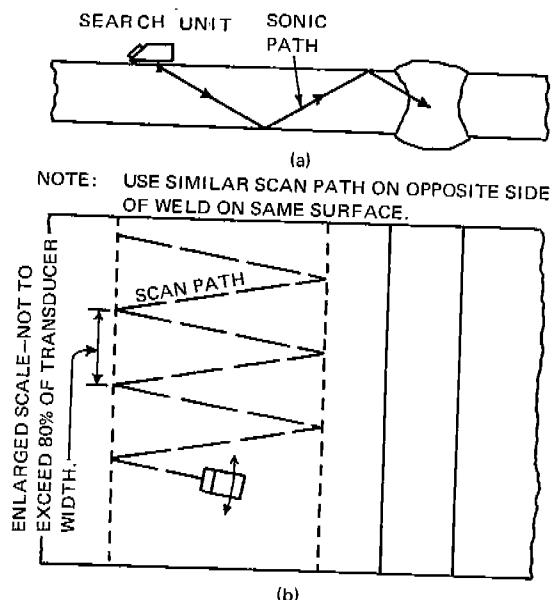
Technique for Inspecting Butt Welds with Shear Waves
